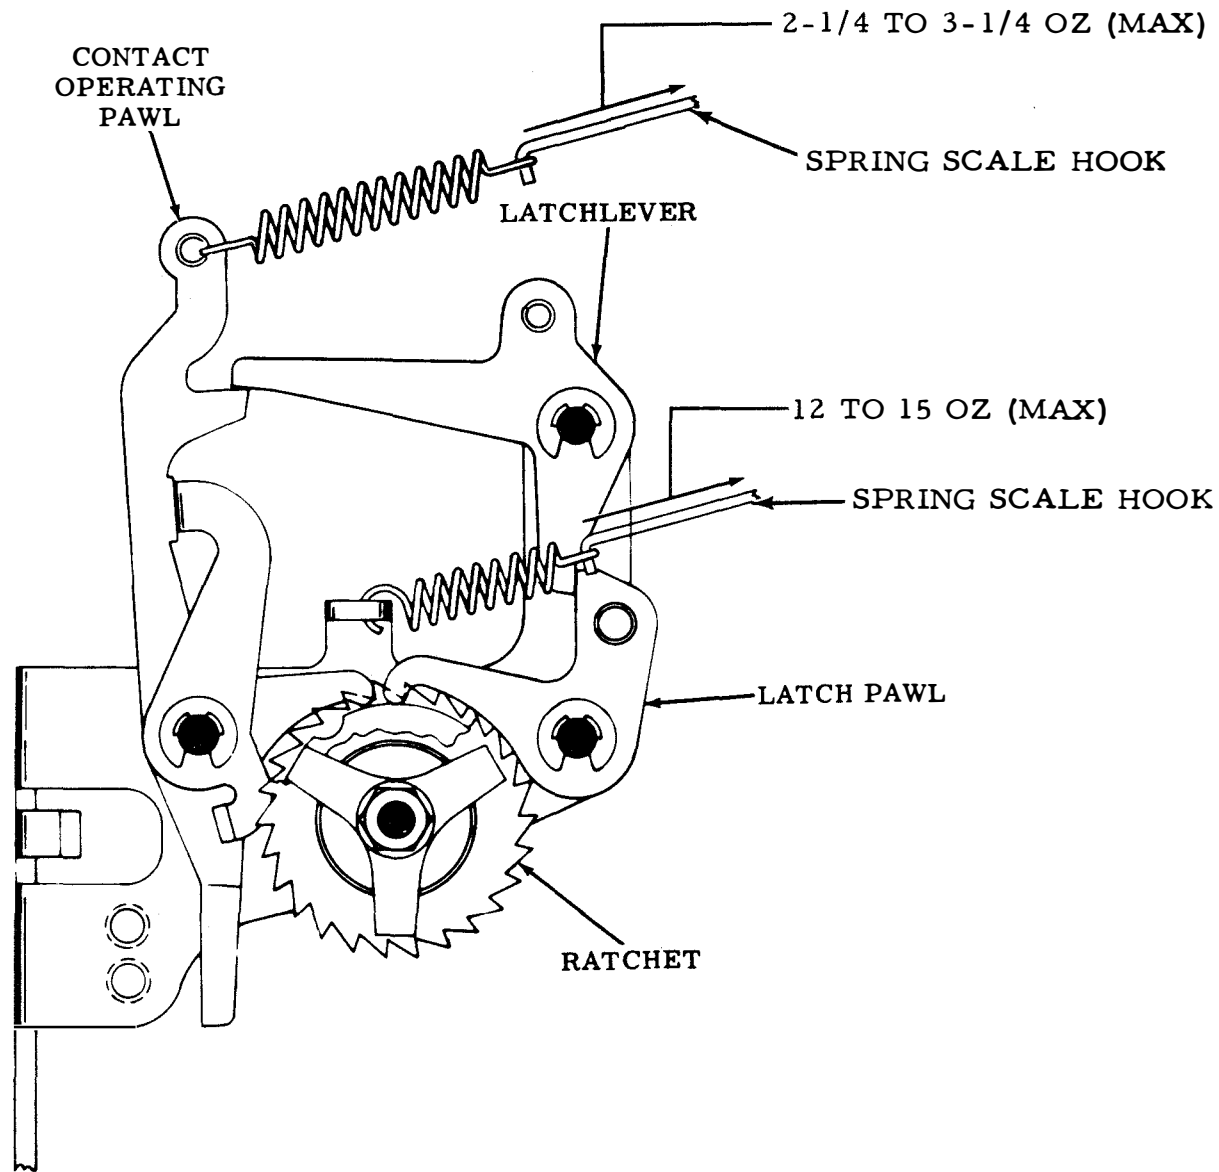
Time Delay Latch Pawl Spring and Contact Operating Pawl Spring
